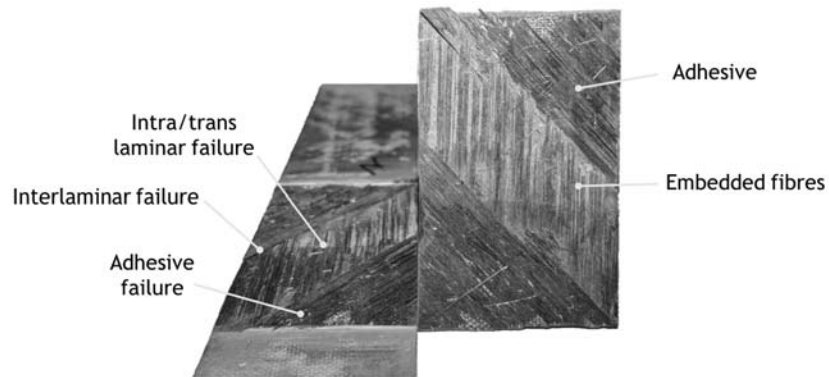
Typical fracture surface of the specimens D, F and G.
